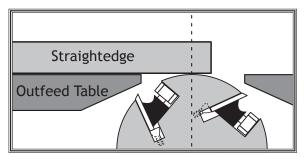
Adjusting outfeed table even with cutterhead body (knife-style cutterhead shown).
